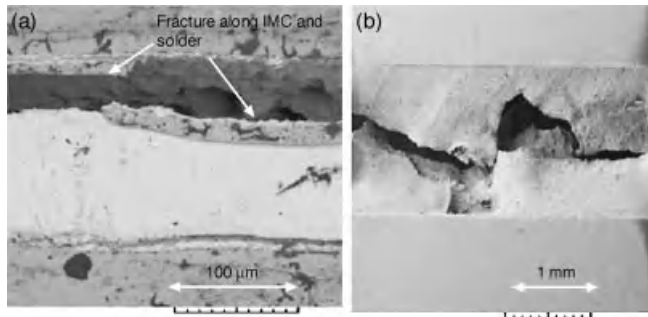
(a) SEM image of a Sn-3.5Ag/Cu solder joint with gap size 160 μm after fracture at 650 N and strain of 50%; the fracture occurs at the interface between IMC and the solder material; (b) SEM image of a solder joint with gap size 790 μm after loading at 90 N and 40% strain; the fracture occurs inside the solder [33, 34]. (Reprinted from *Journal of Electronic Materials*, Mechanical Size Effects in Miniaturized Lead-Free Solder Joints by P. Zimprich, U. Saeed, A. Betzwar-Kotasi, B. Weiss and H. Ipser, 37, 1, 102–109 Copyright (2008) Springer Science + Business Media). (Reprinted from *Journal of Materials Science: Materials in Electronics*, Size effects in small scaled lead-free solder joints by P. Zimprich, A. Betzwar-Kotas, G. Khatibi, B. Weiss and H. Ipser, 19, 4, 383–388 Copyright (2008) Springer Science + Business Media).
